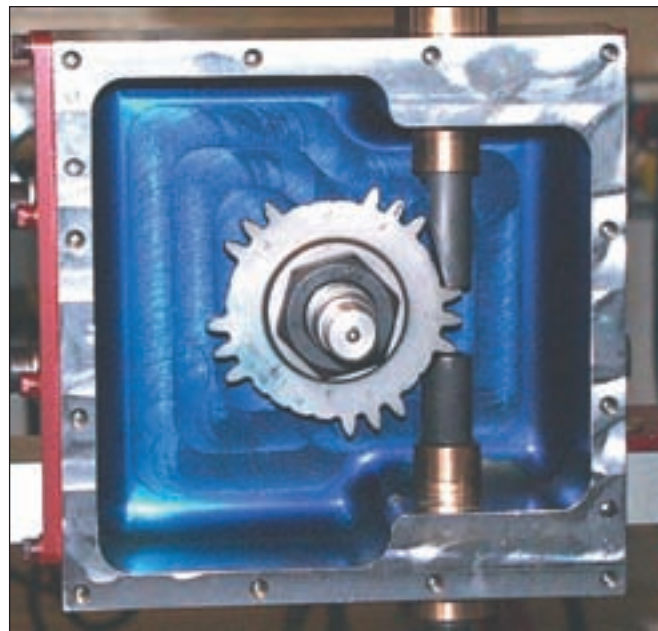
Test gear installed in test fixture, cover removed for photograph.
